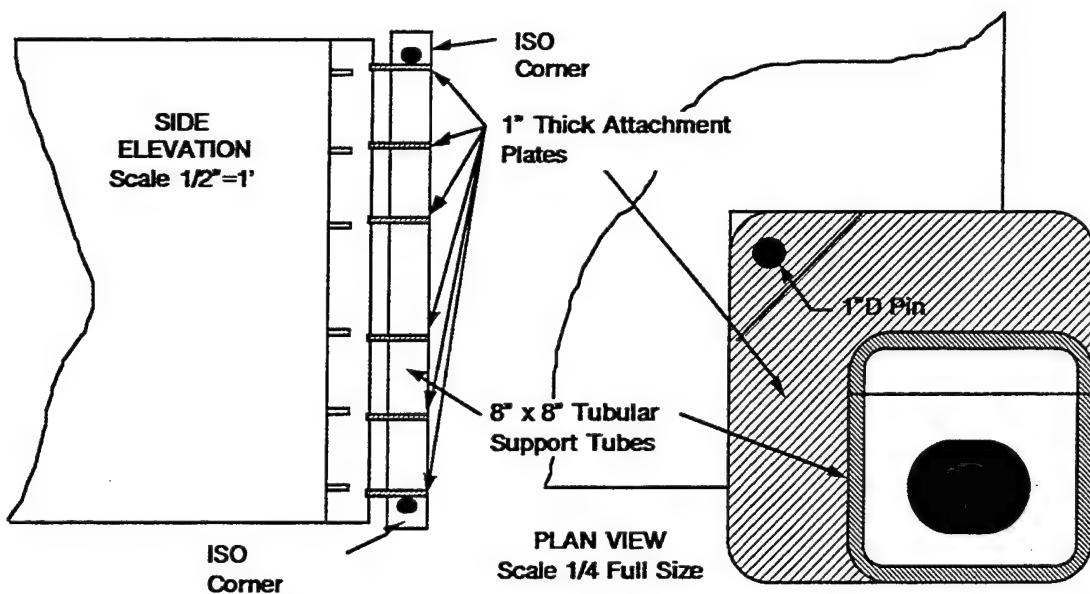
Tri-Module Removable Corner Fittings include ISO corners
